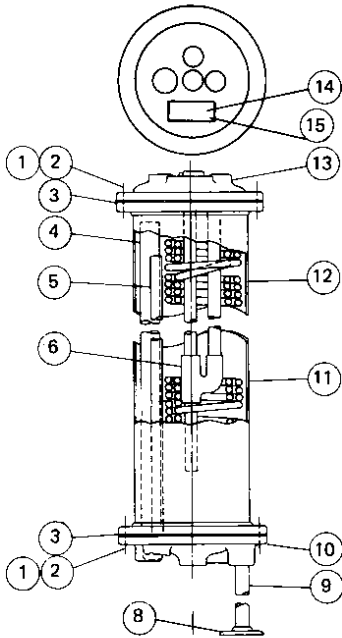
Angely Hot Water Generator Models 1001A-1005A Assembly & Parts List
